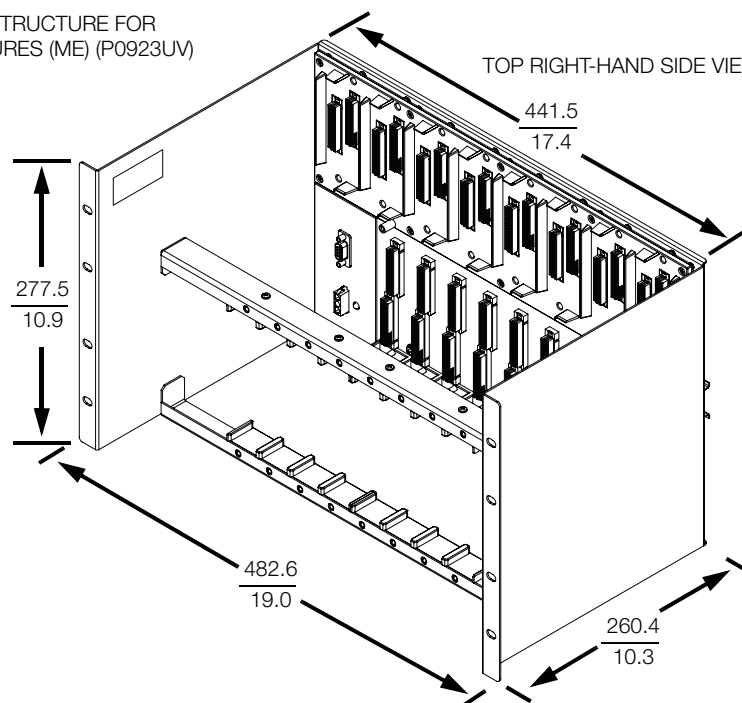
Dimensions - Mounting Structures for Industrial Enclosures 16/32 (P0923US) and Metal Enclosures (P0923UV)
